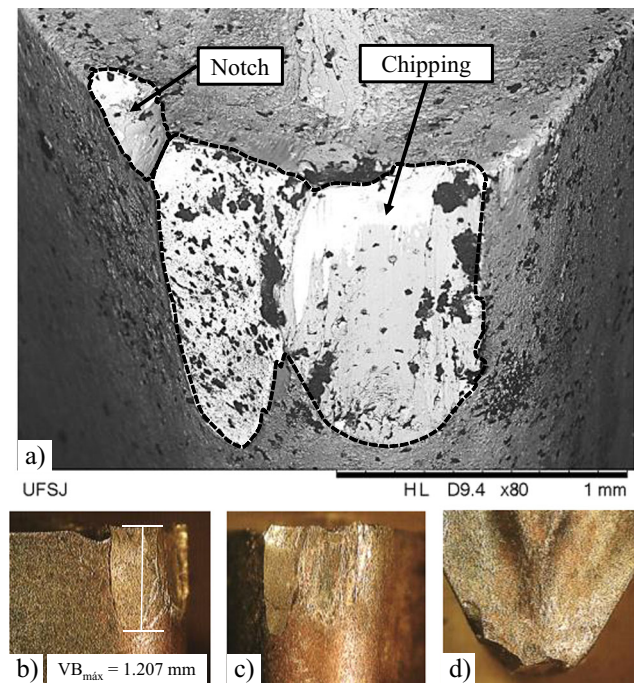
Cutting tool with $VB_{max} = 1.207$ mm used in turning with the cold air system with cutting speed of 200 m/min. a SEM. b Clearance surface. c Tip. d Rake surface
